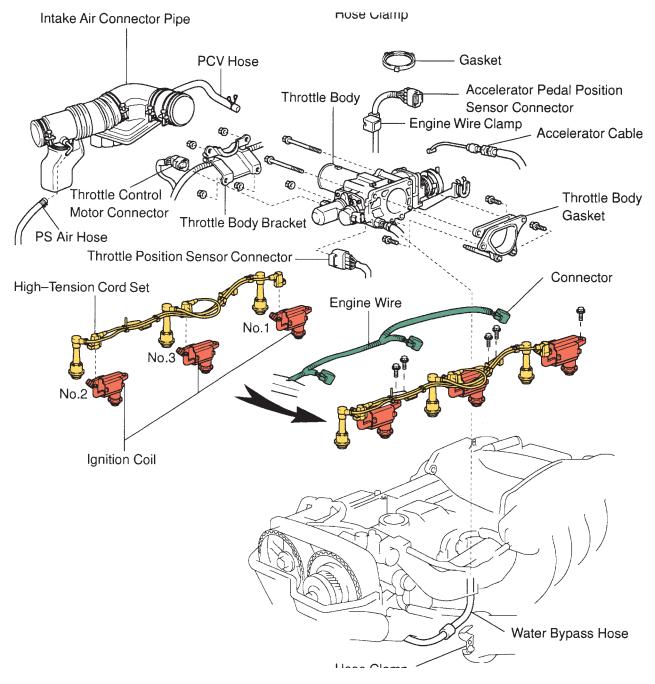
A six-cylinder engine with three coils and three spark plug wires. Reprinted with permission
